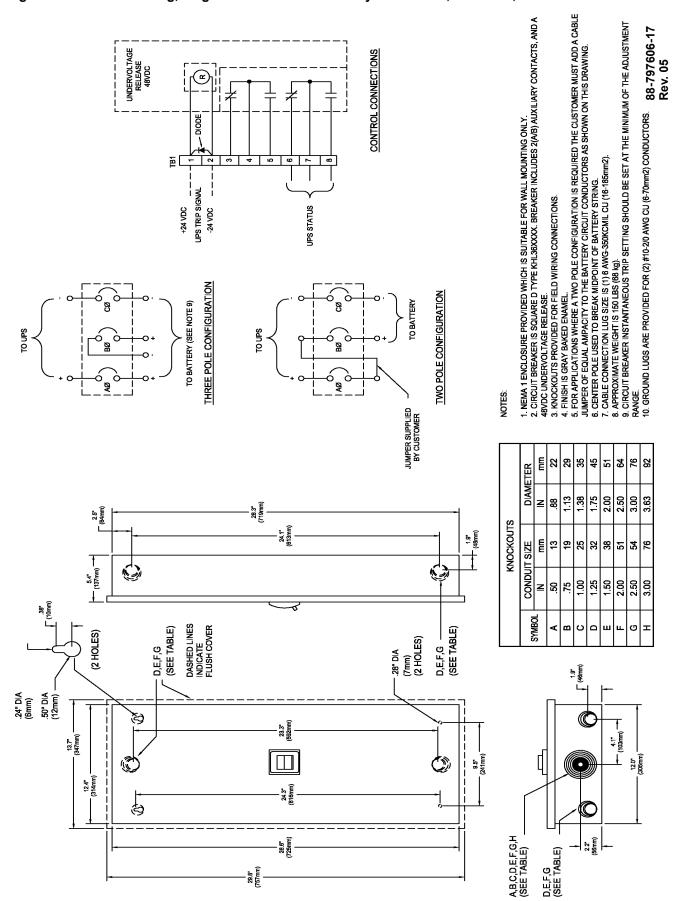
Outline drawing, dual-breaker module battery disconnect, 175-250A, 600VDC circuit breaker
